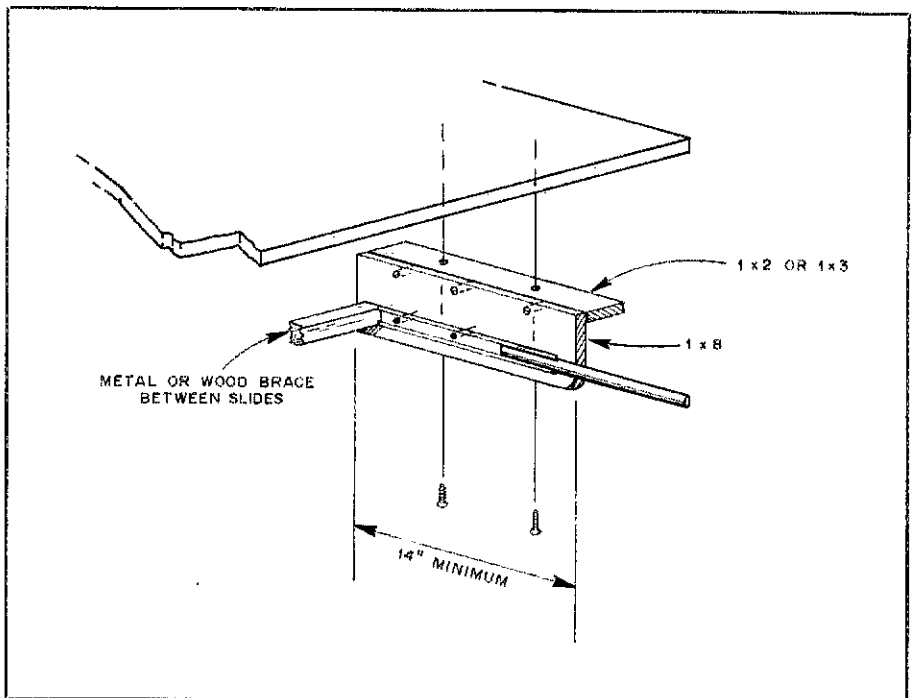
Construction and mounting details of a side-support and drawer-slide assembly. Dimensions and materials shown are those used by the author and are not critical.
